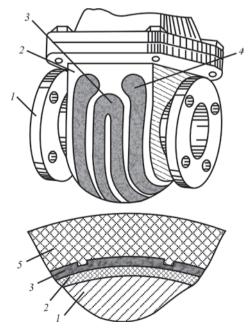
Casing of stop valve with sprayed heating element [12]: *I* — casing; *2* — electrical insulating layer; *3* — resistive track; *4* — supplying electrical contact; *5* — additional external electrical insulating layer
